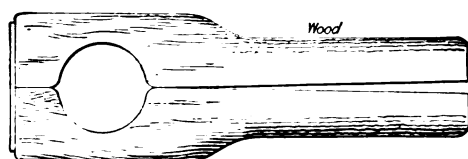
DETAILS OF CLAMP AND HOLDING FIXTURE
